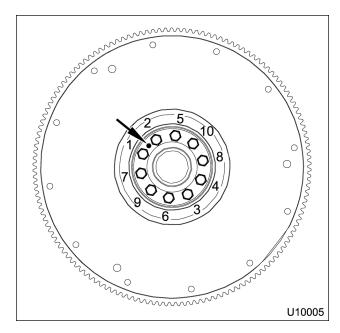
Torque sequence for flywheel assembly bolts and dowel location
